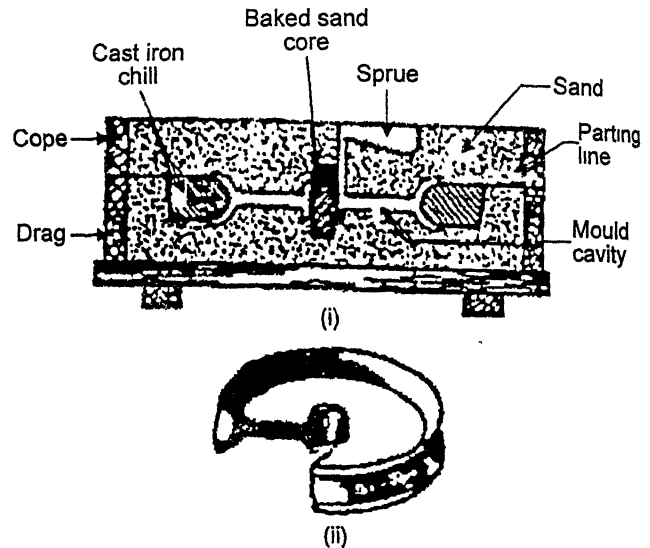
(i) and (ii). Typical mould in cross-section.
